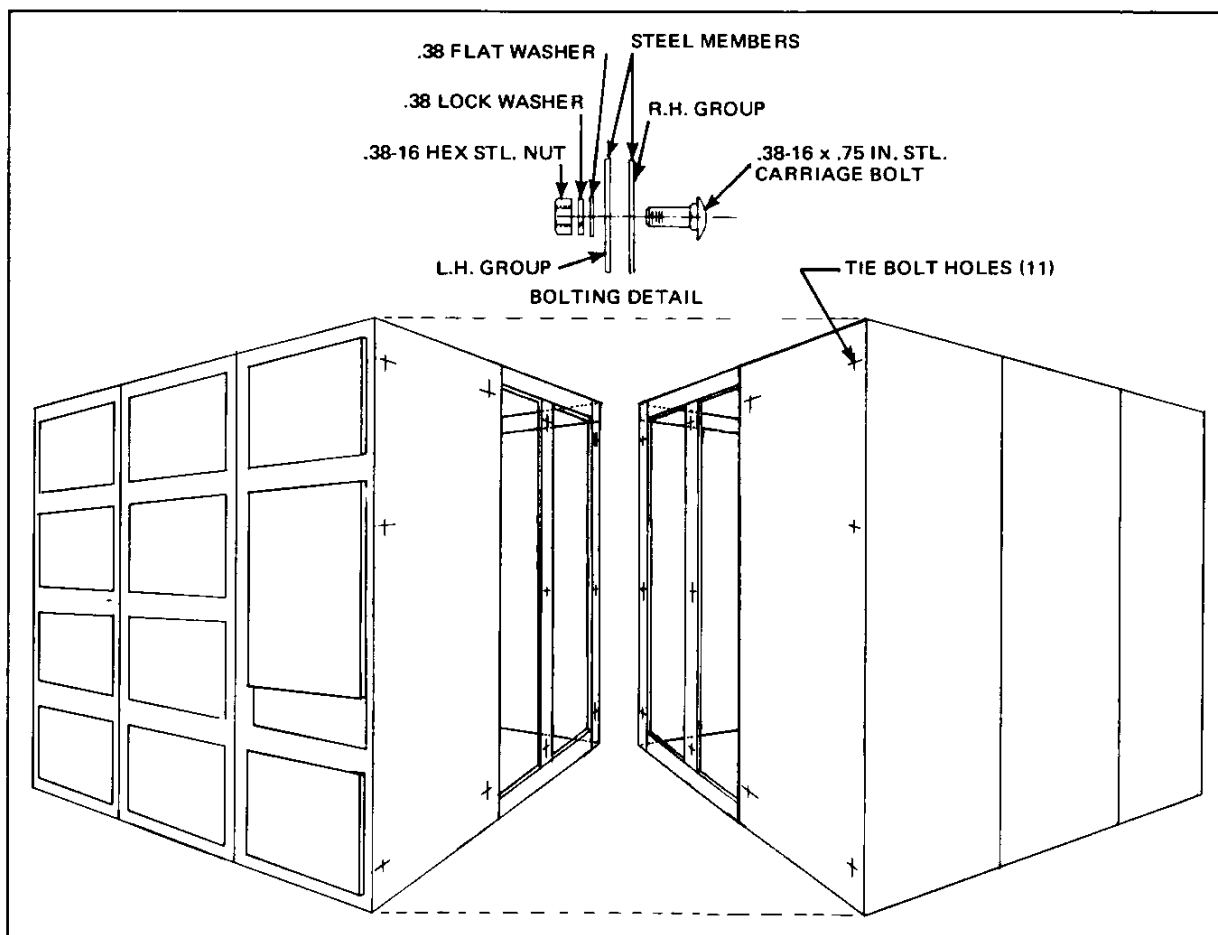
Tie Bolt Locations for Joining Units at Shipping Break
